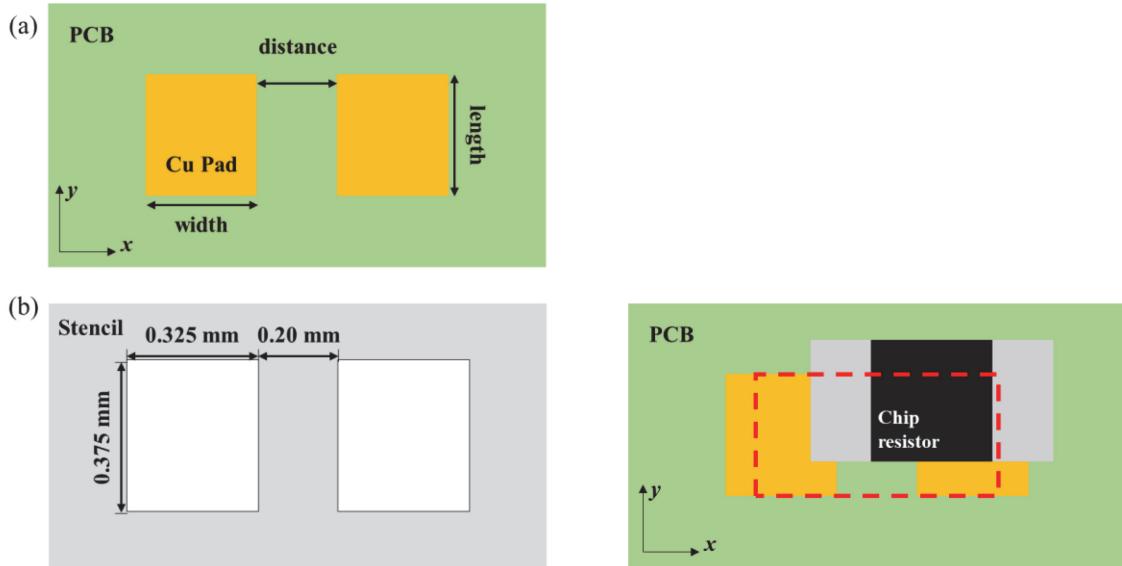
Schematics of (a) pad on PCB, (b) stencil design for printing solder paste, and (c) misplacement position of 0603 chip resistor.
